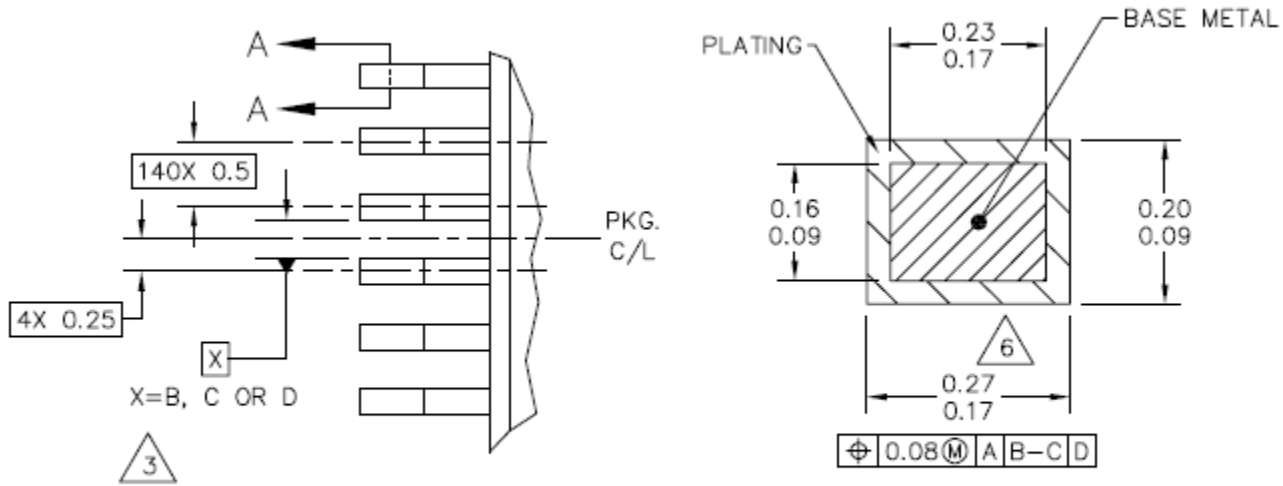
144-Pin Package Outline Drawing (2 of 2)
